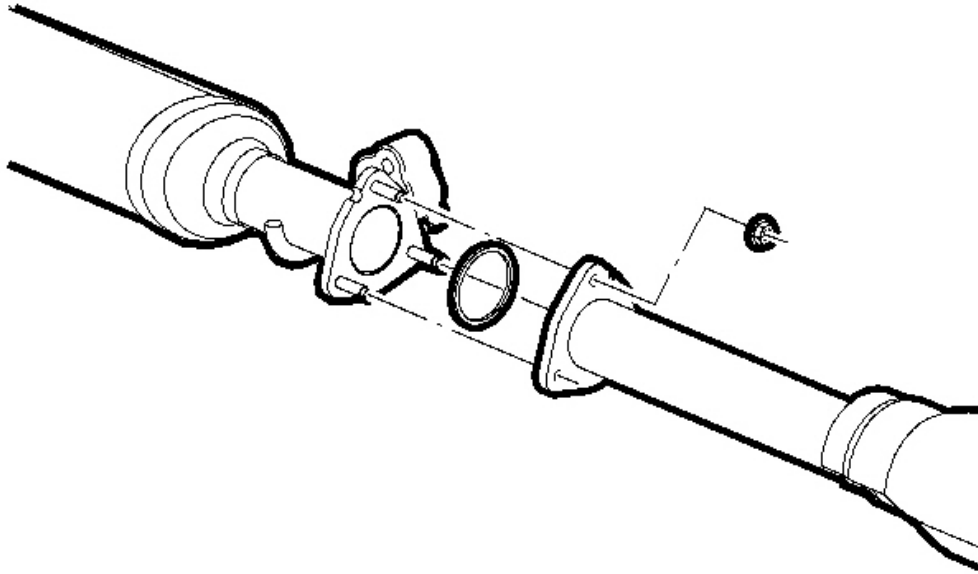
View Of Gasket Onto The Front Pipe Flange
